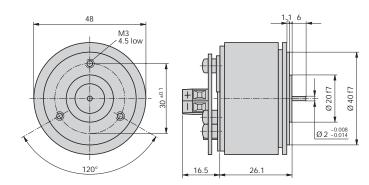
KINAX 2W2 with standard drive shaft at front only, Ø 2 mm, length 6 mm, screw terminal version
